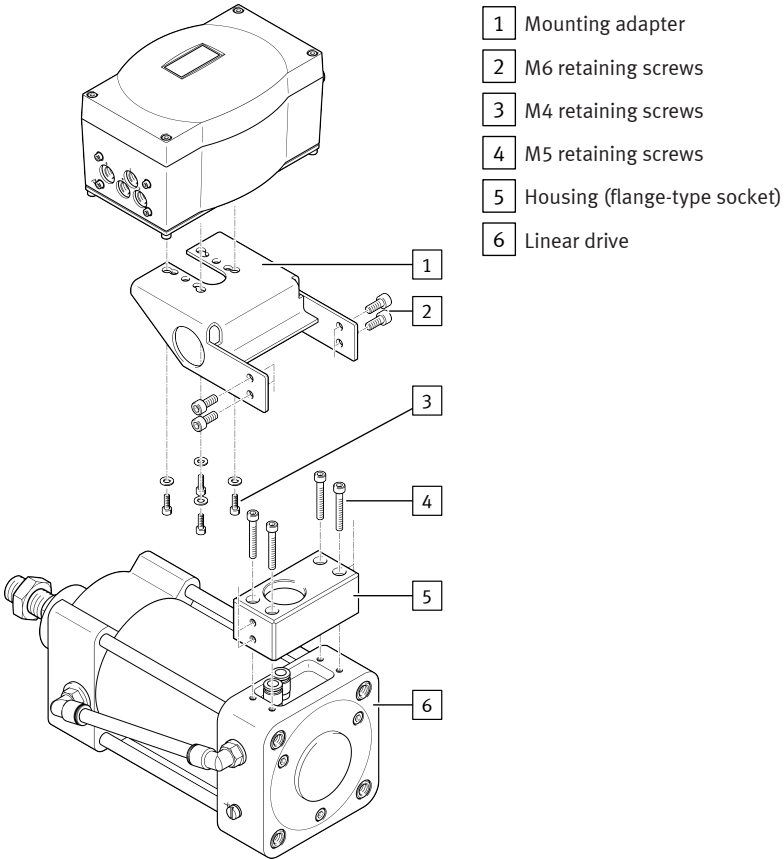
Mounting CMSX-P-SE-... on the drive DFPI-...-E-NB3-...
